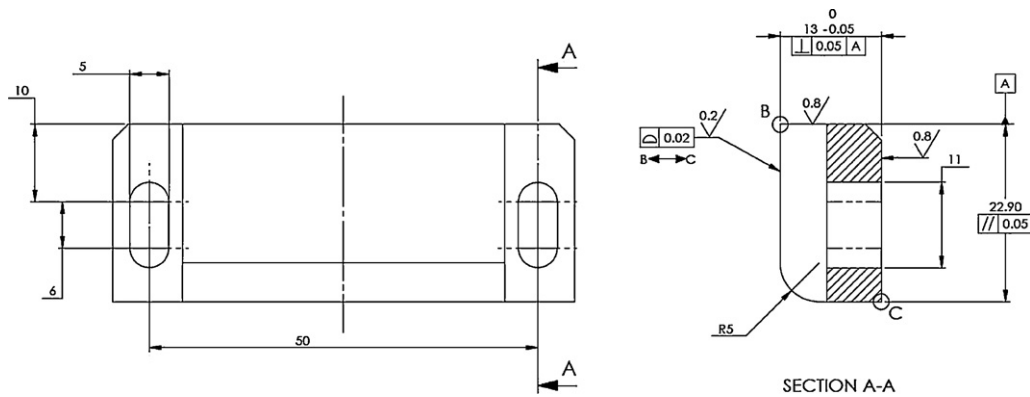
Excerpt from the engineering drawing of the die radius insert. All dimensions in mm. General linear tolerance  $\pm 0.2$  mm.
